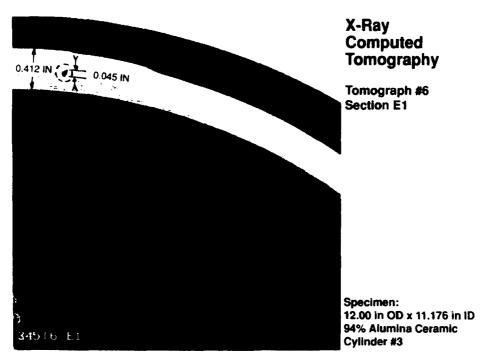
RCT slice through a large flaw in cylinder #3. The measured size of indication cross section is 0.045 inch. The SAM indication of this flaw is shown in figures E-11 and E-12.
